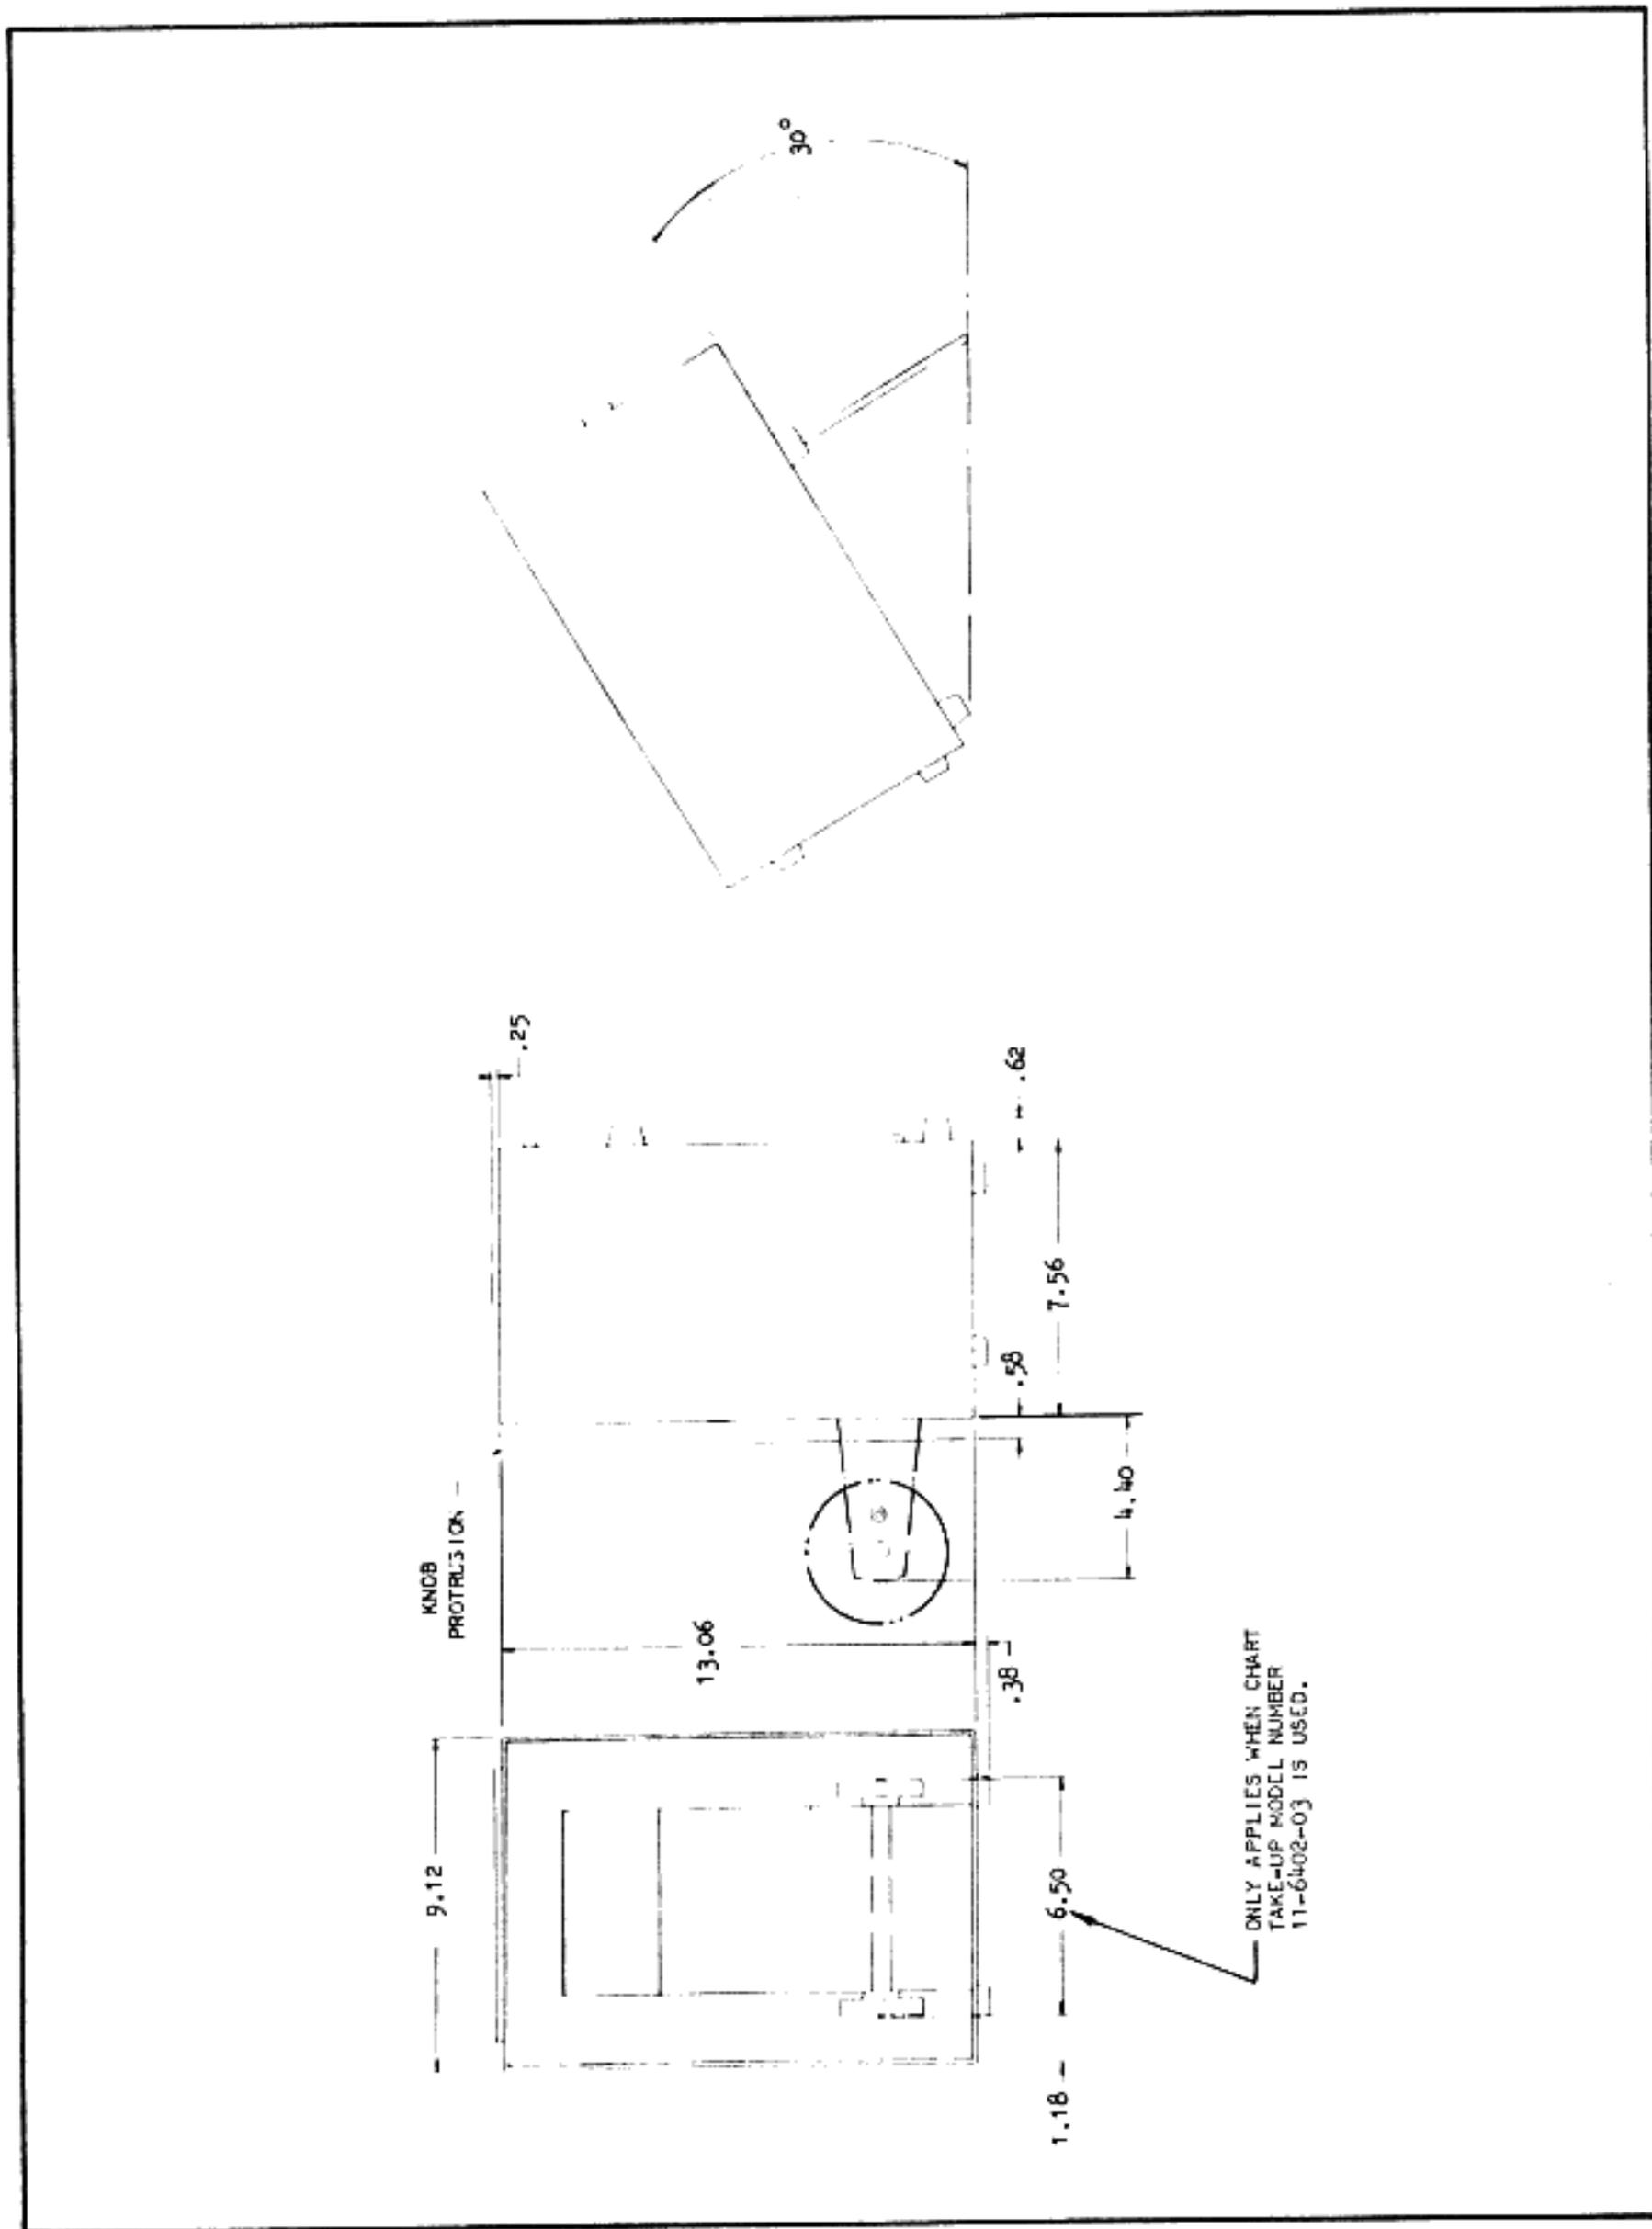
GOULD 220 RECORDERS -- OUTLINE DIMENSIONS
